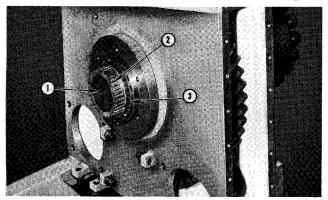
RETAINER CAP REMOVED 1. Axle 2. Locknut 3. Bearing
